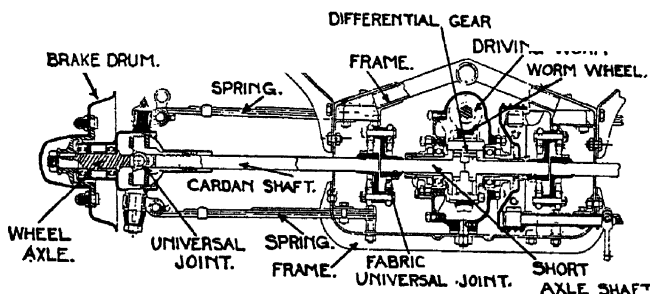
Front Sectional View of B.S.A. Front-Drive Car.
